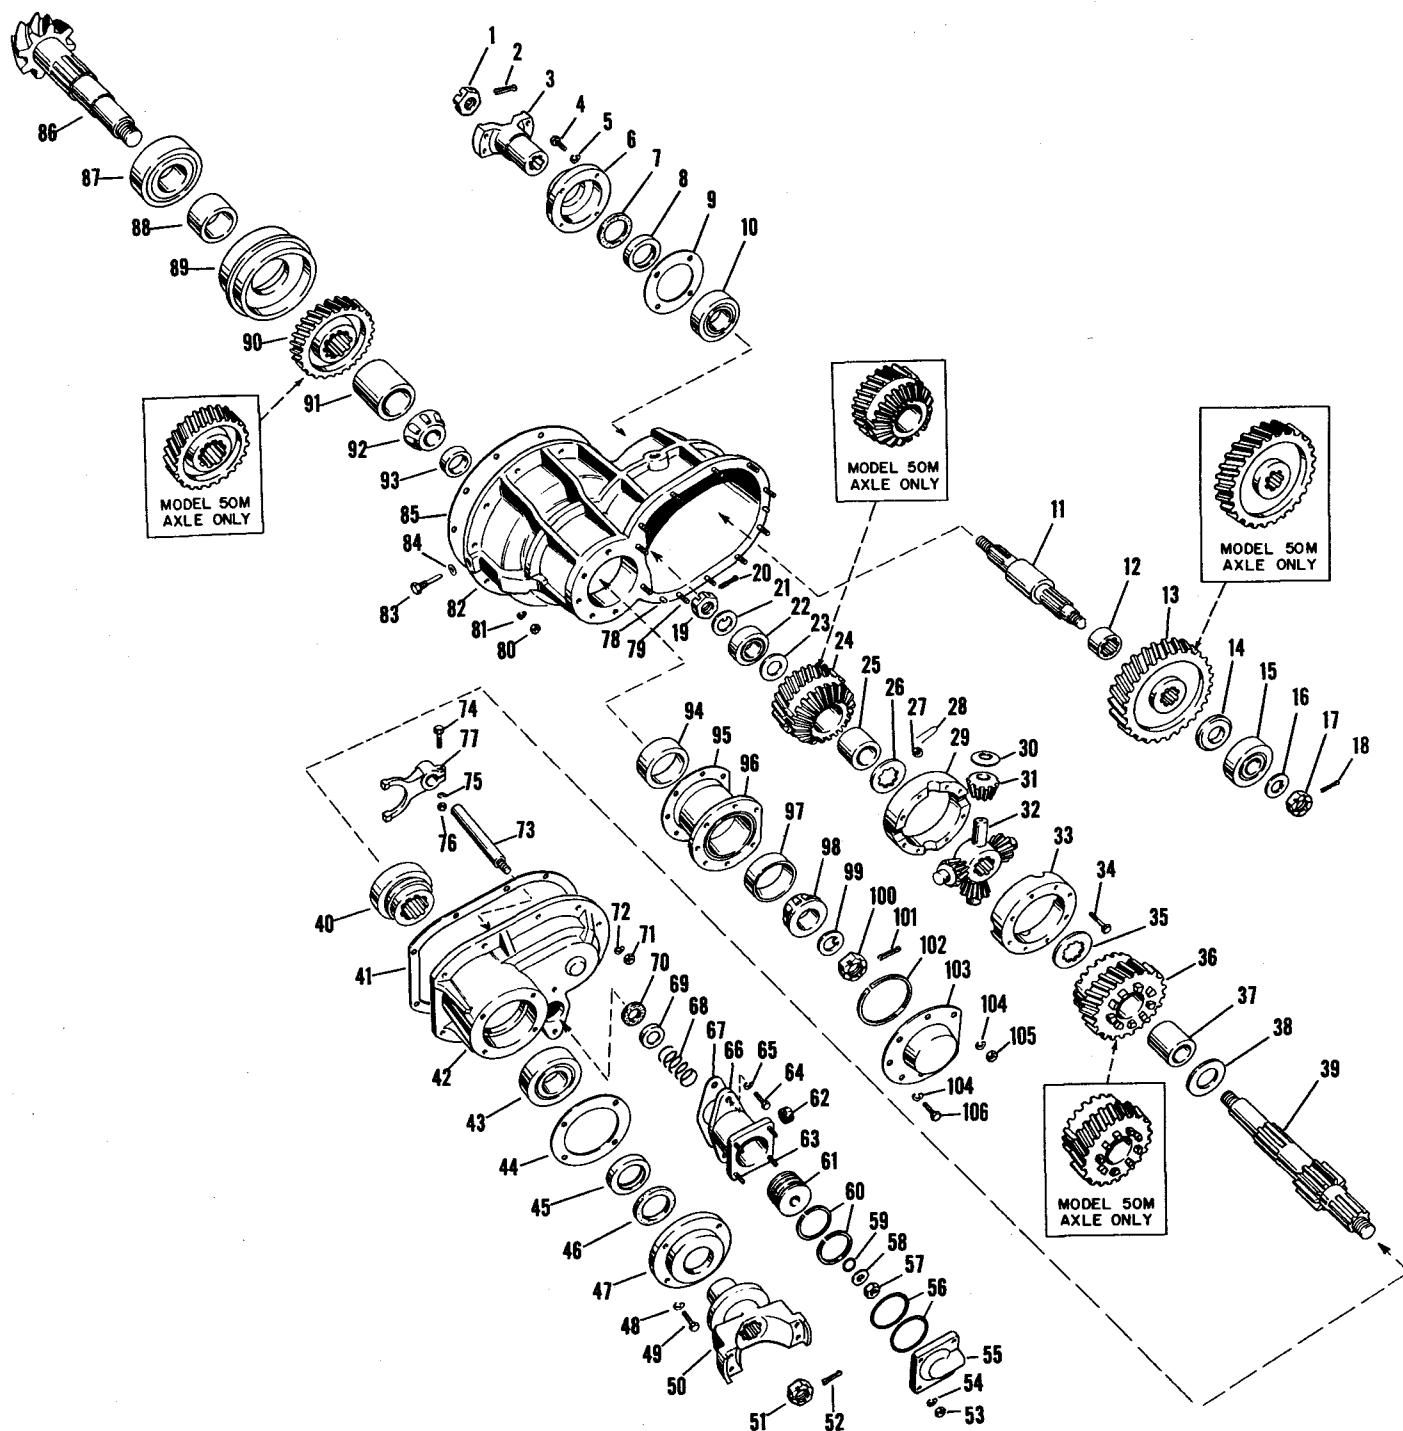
Exploded View of Power Divider for Model 36M and 50M Tandem Drive Axles
